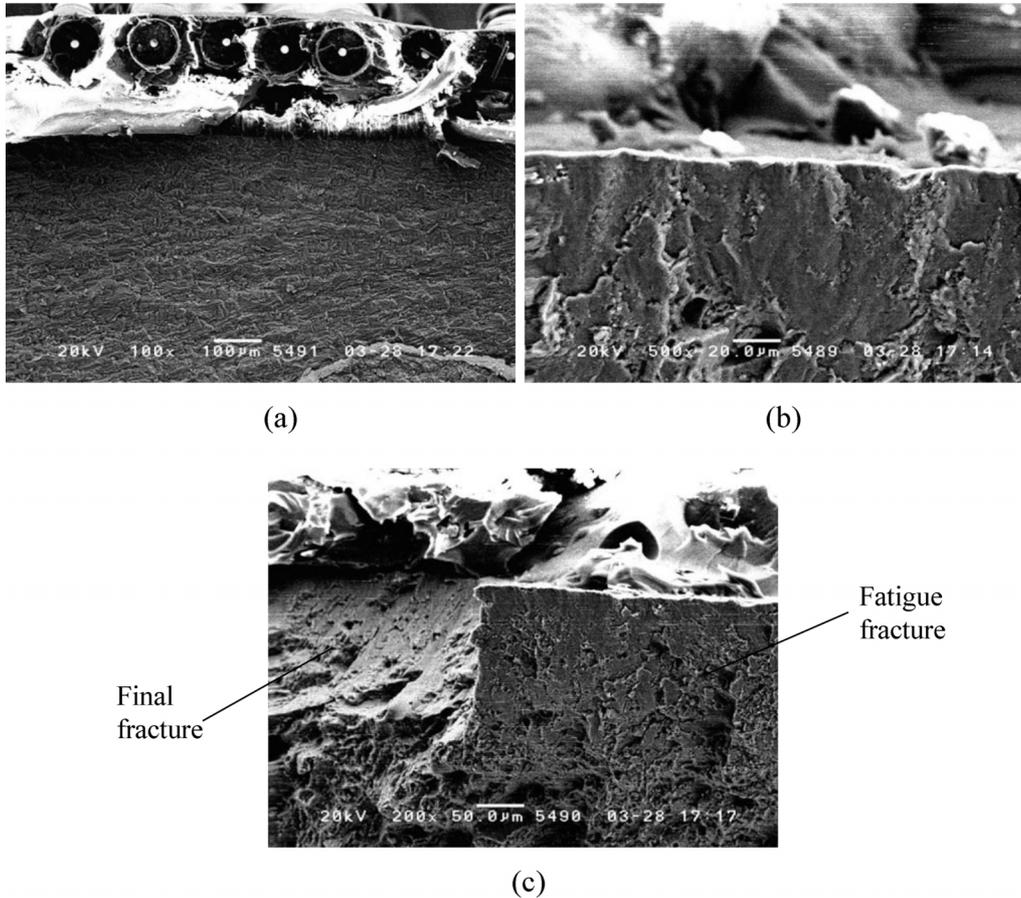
SEM micrographs showing fatigue fracture of 1-ply patch repair (a) Overview of the fatigue fracture surface (b) Disbonding failure in the adhesive layer (c) Fatigue crack growth and final fracture
